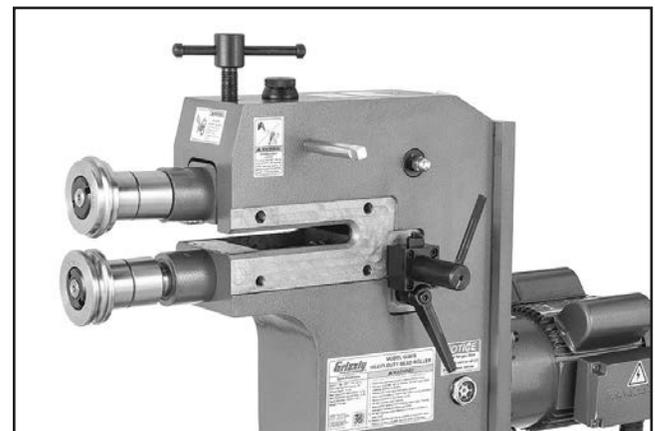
Machine set up for rolling curved or straight, non-parallel beads.
